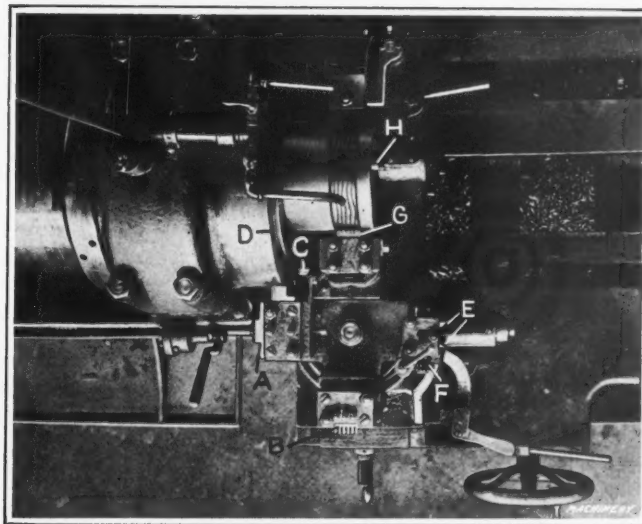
Close View of Tools used on Machine shown in Fig. 9
